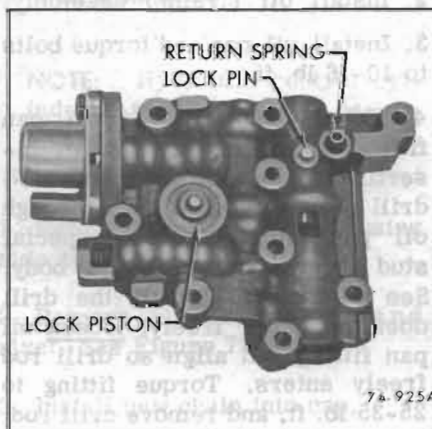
Installing Lock Piston, Lock Pin and Return Spring
